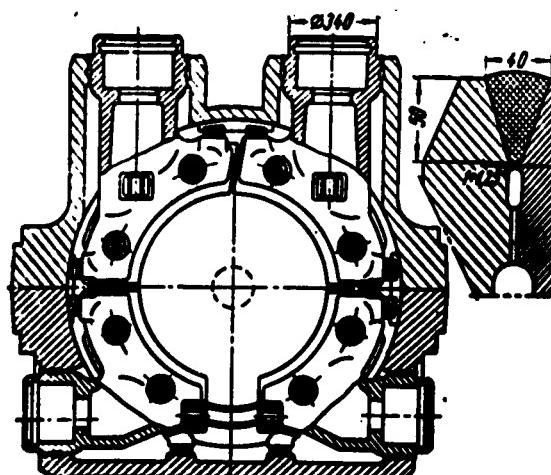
Welded-cast inner cylinder of SVK-150 turbine.
